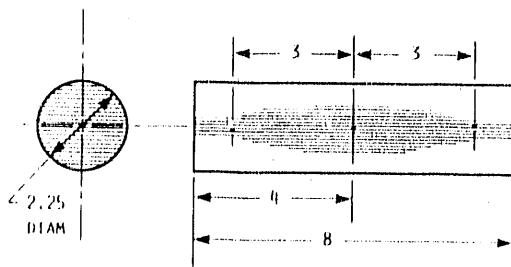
Compression test specimen. (Dimensions are in inches.)
